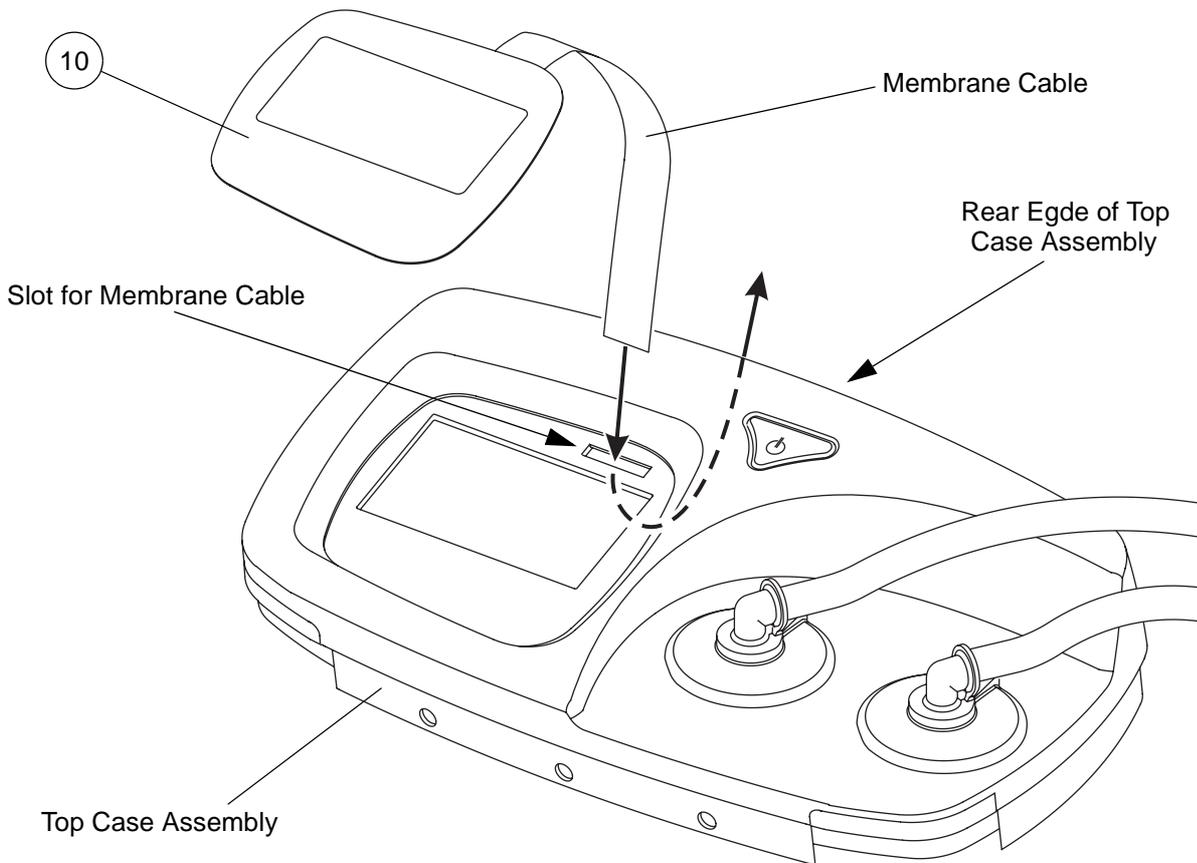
Replacing the Membrane Label without removing the Control PCB Assembly from the Top Case Assembly
